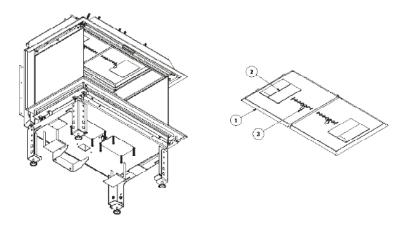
Deflector assembly: 1 - deflector; 2 - shutter; 3 - shutter handle
